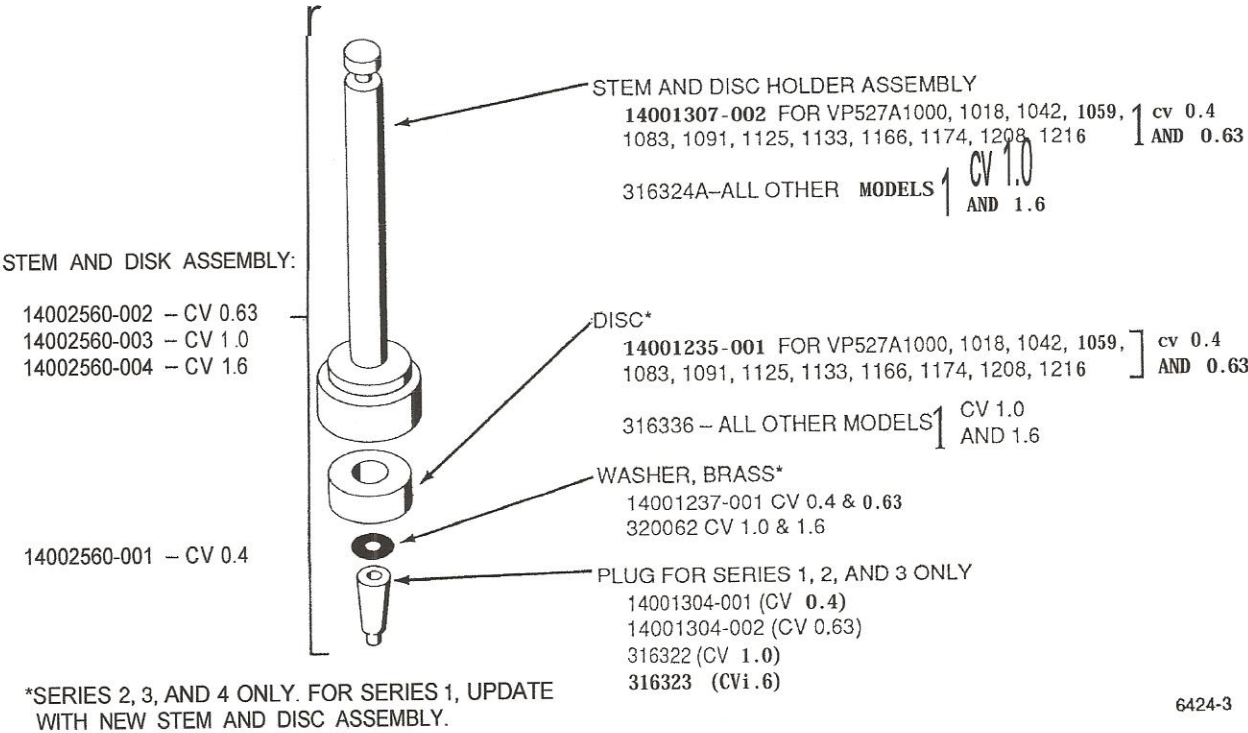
Exploded Diagram of Stem and Disk Assembly.
